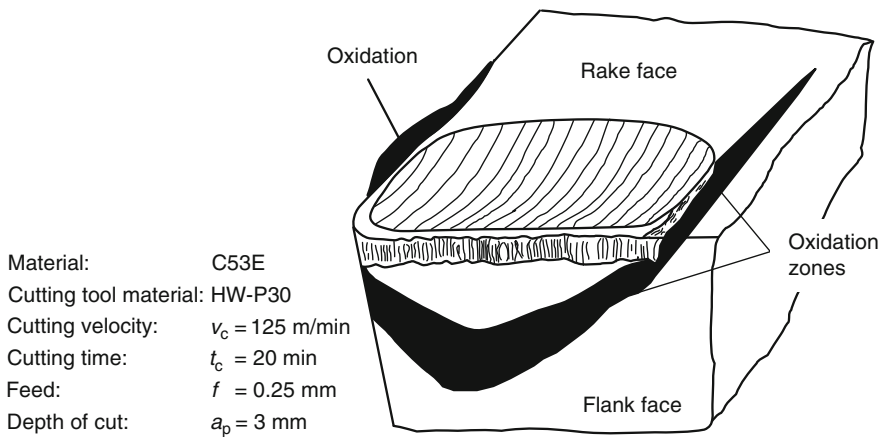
Oxidation zones at a cemented carbide turning tool
